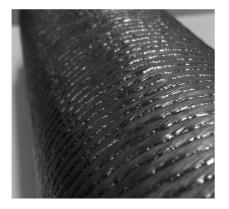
Sample overlay welded in protection of fourcomponent gas mixture
